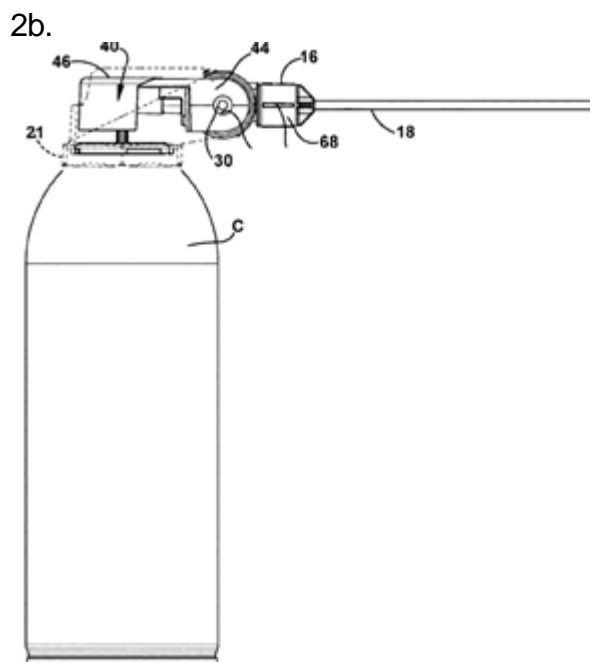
illustrates a horizontal position of an outlet tube (18) supplied by a rotatable valve assembly.
